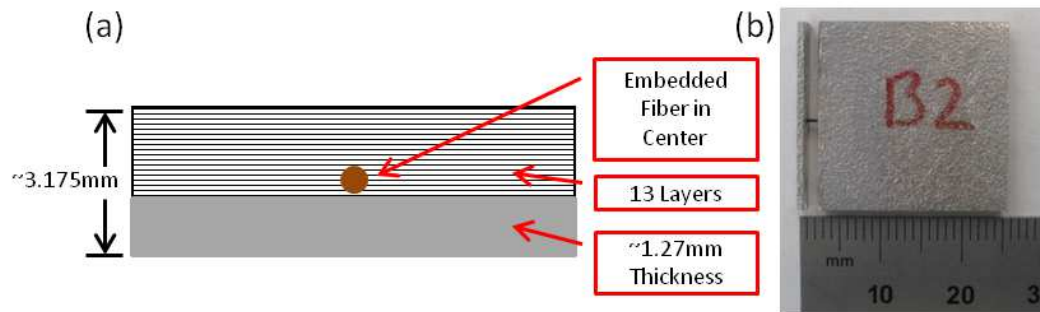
Sample details: (a) schematic of sample cross section with key fabrication details; (b) physical sample ready to test post manufacture.
